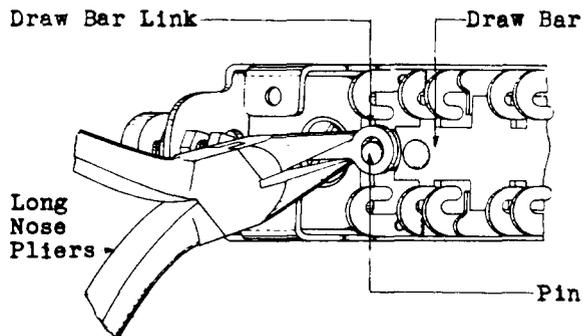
Method of Disconnecting Draw Bar Link from Spring Load
